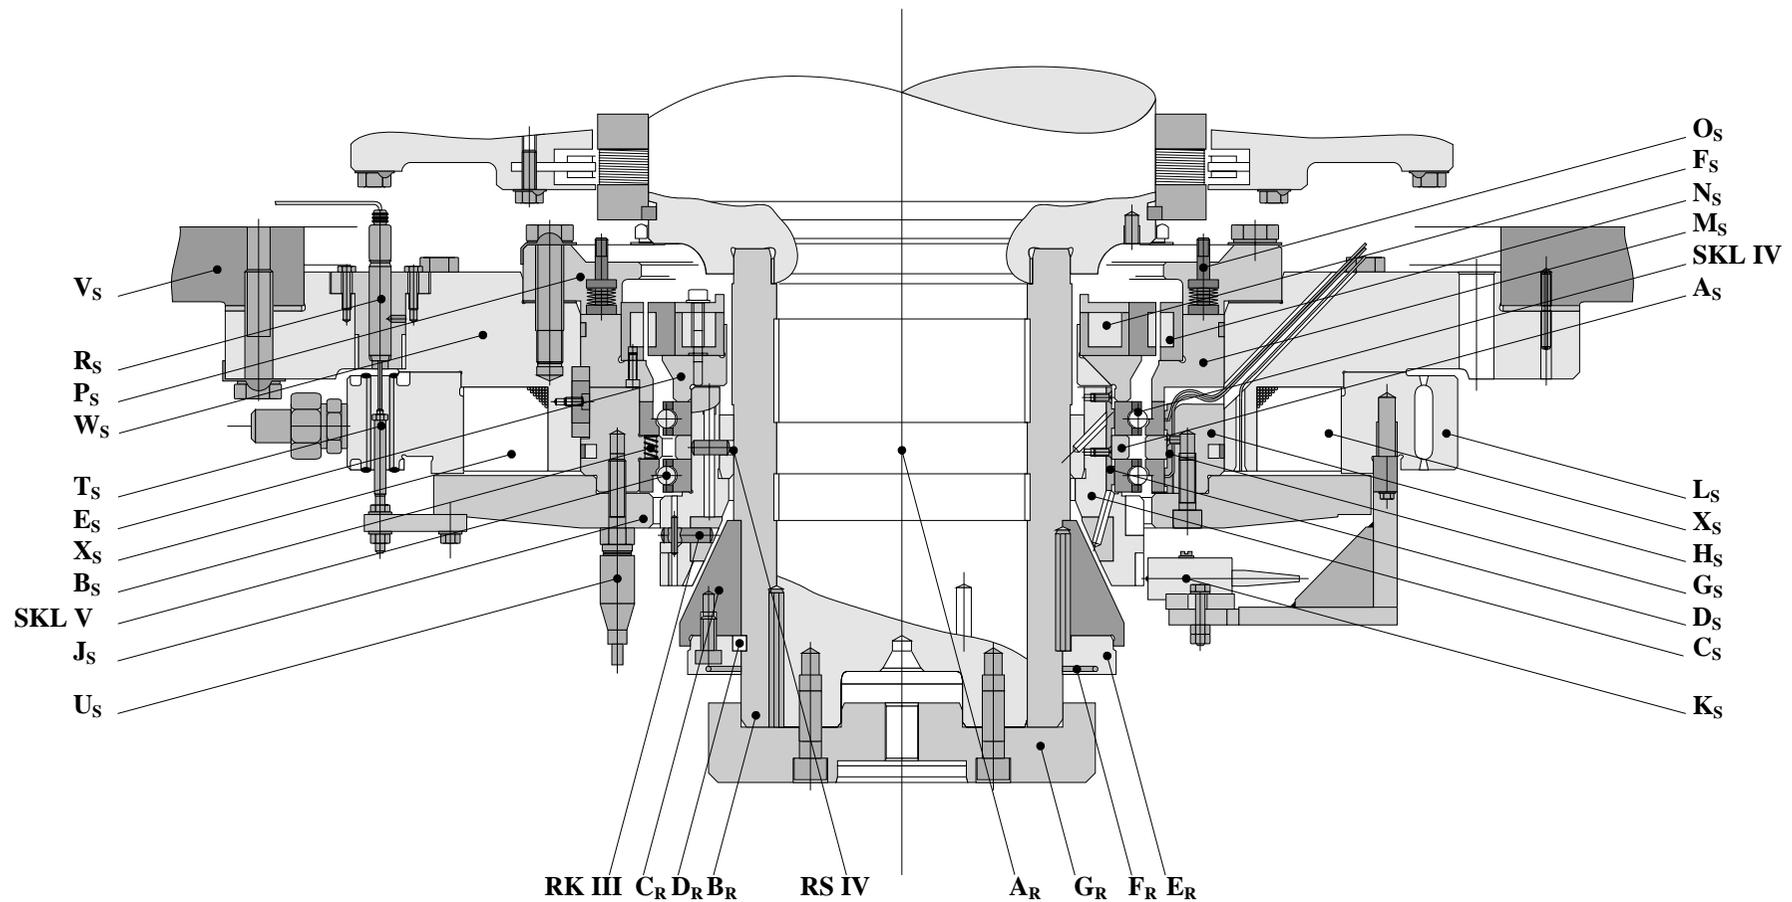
Design of the Axial Radial Catcher Bearings including Friction Cone Mechanism
